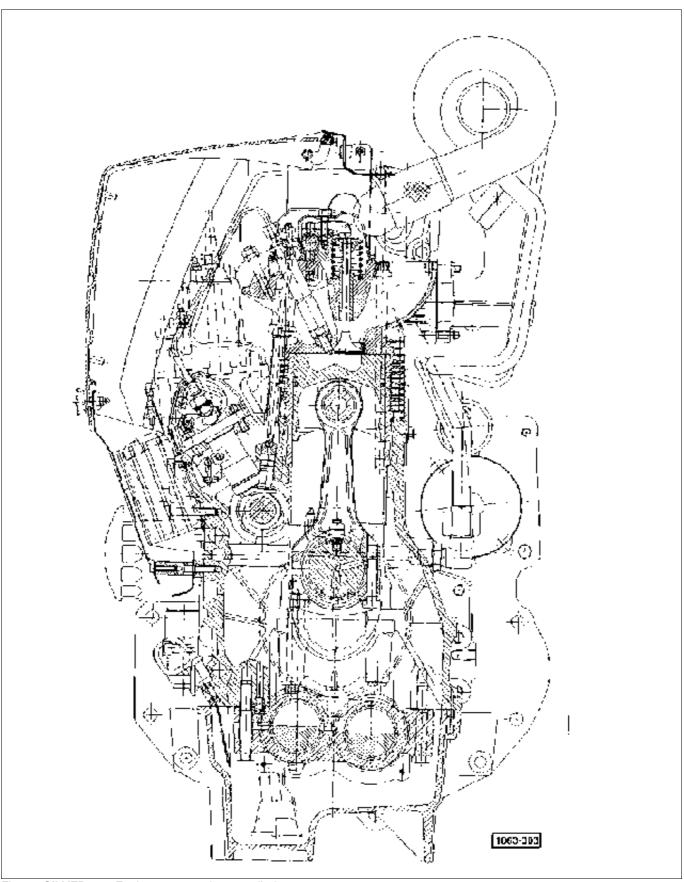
SILVER 90 - Engine cross section - 4 cylinders.
